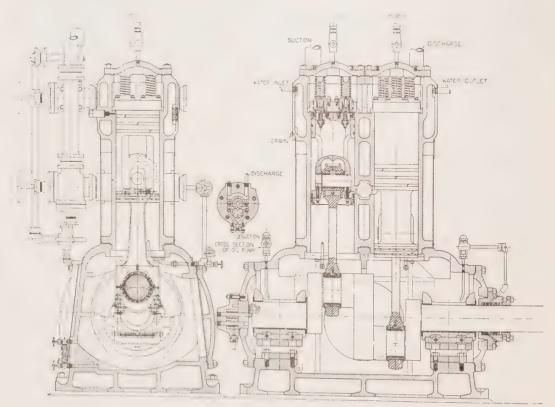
Sectional assembly of vertical refrigerating compressor. (Note position of the false cylinder head)
